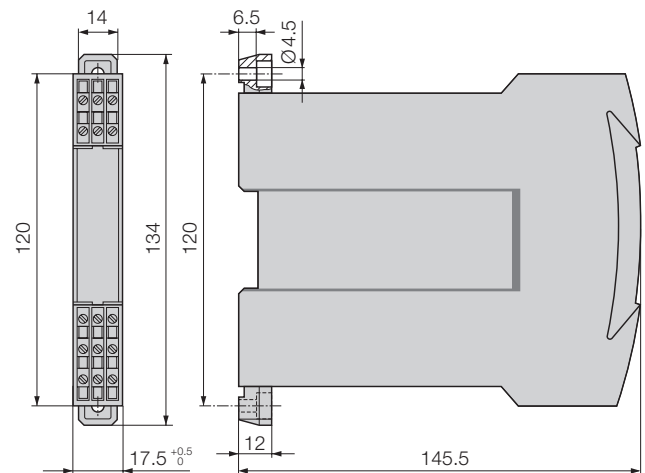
SINEAX TV 808 in housing S17, screw hole mounting brackets pulled out.
